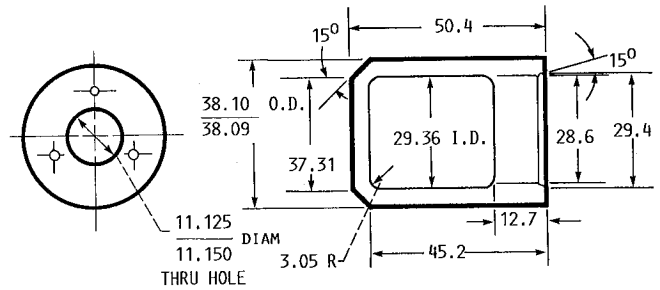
JOURNAL FOR COMPLIANT FOIL GAS BEARING. MATERIAL, INCONEL 718. DIMENSIONS ARE IN MILLIMETERS.
